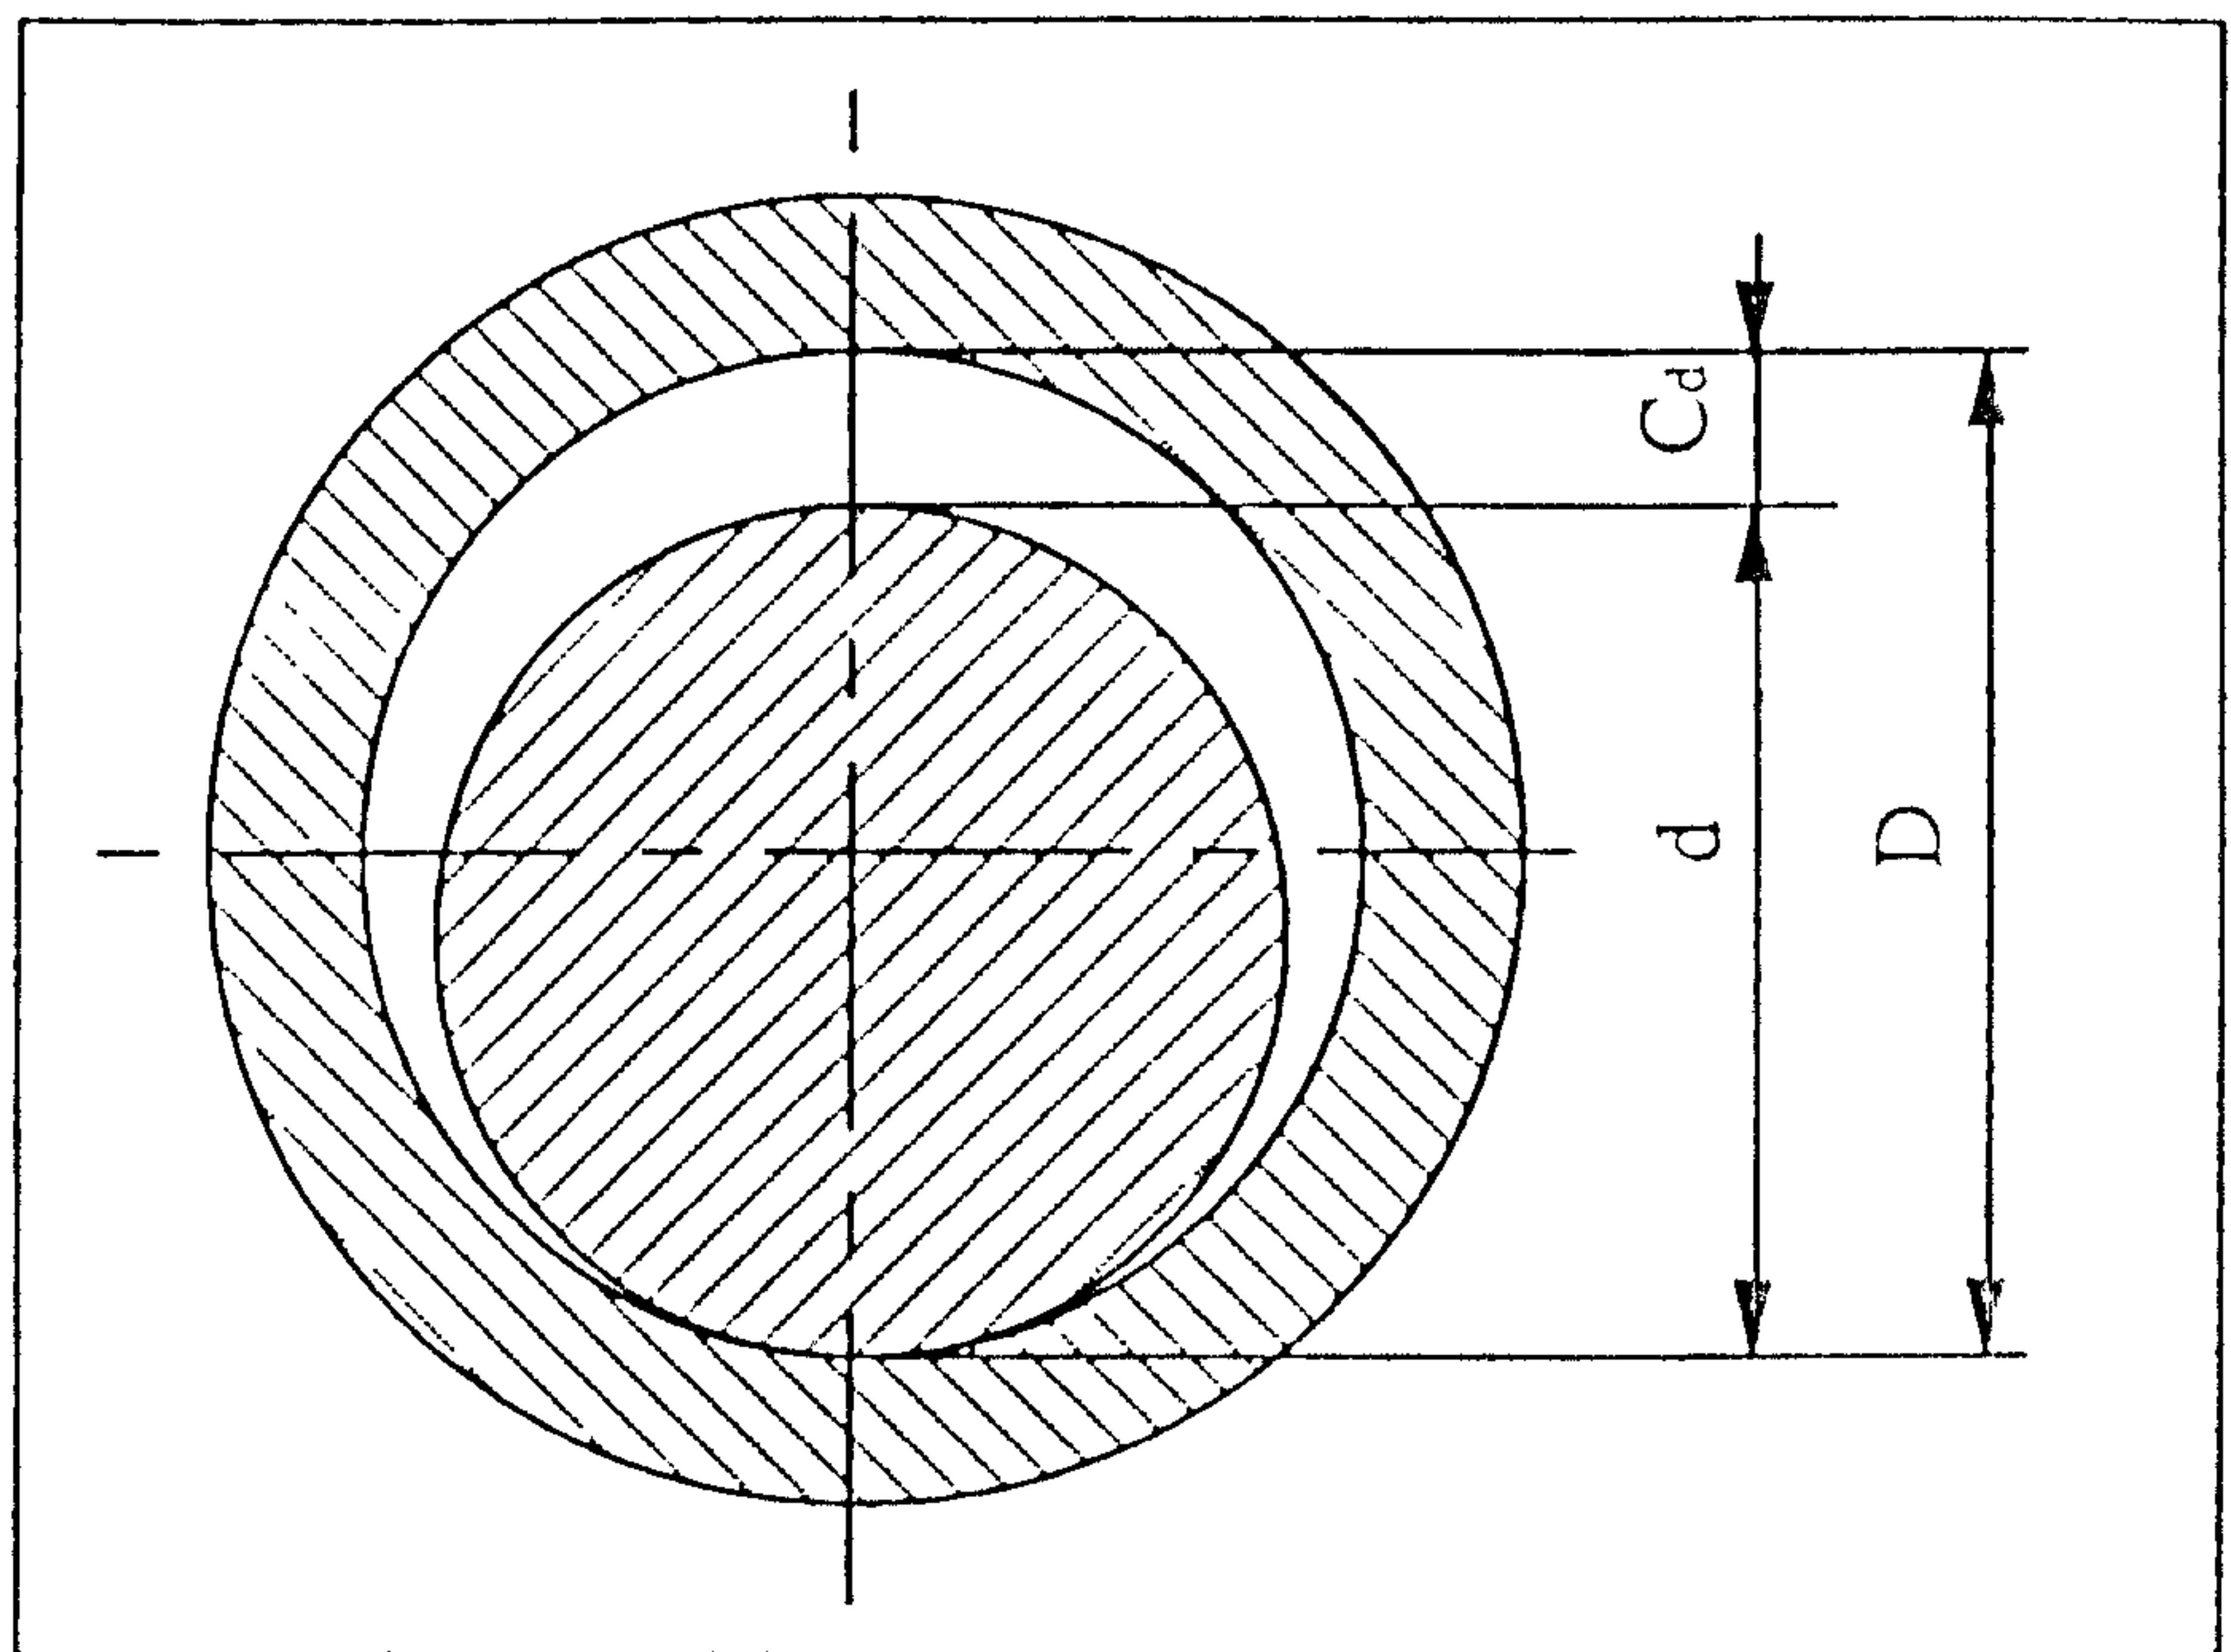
Relationship of the shaft, bearing housing and the diametral clearance
